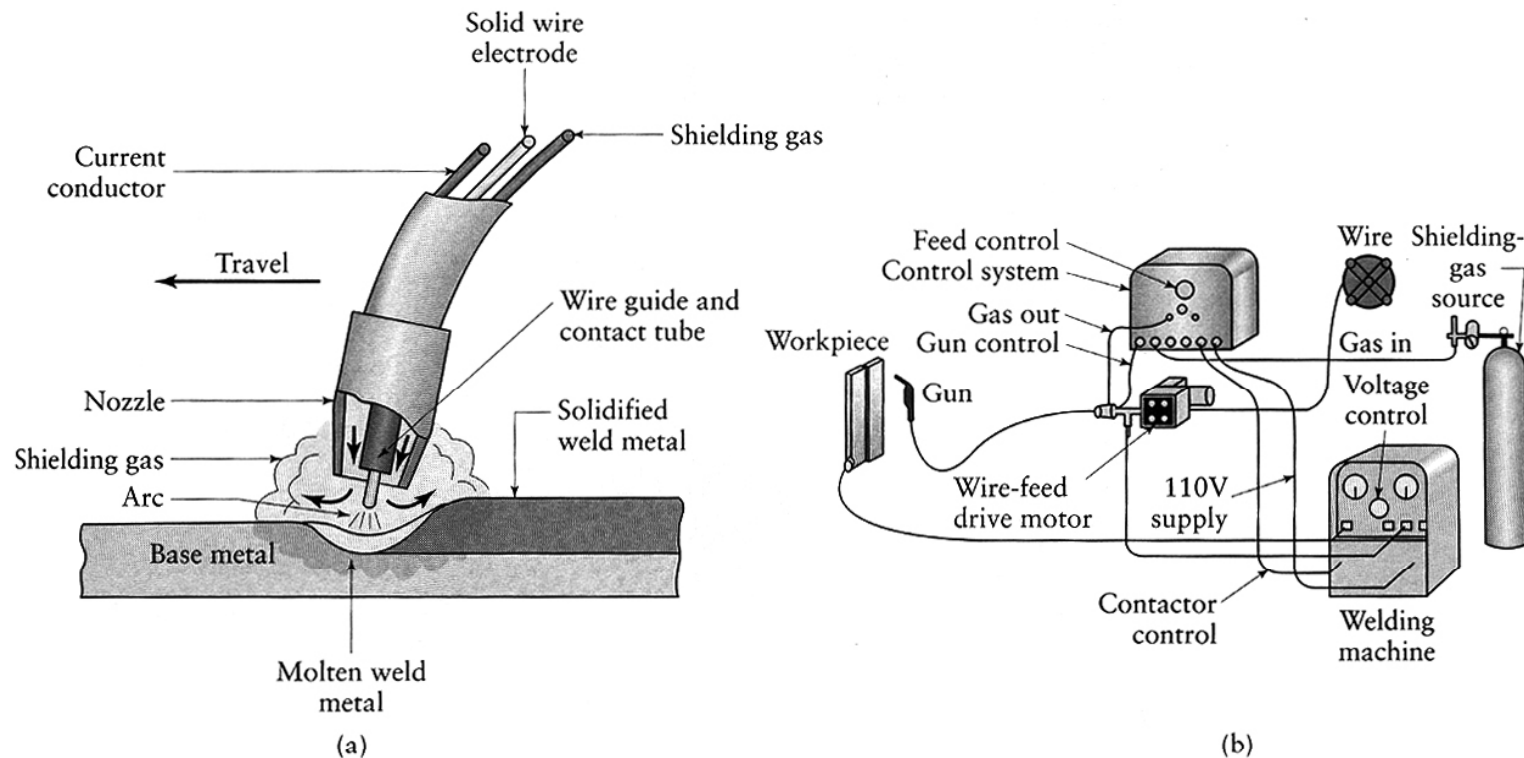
(a) Gas metal-arc-welding process, formerly known as MIG welding (for metal inert gas). (b) Basic equipment used in gas metal-arc-welding operations.
